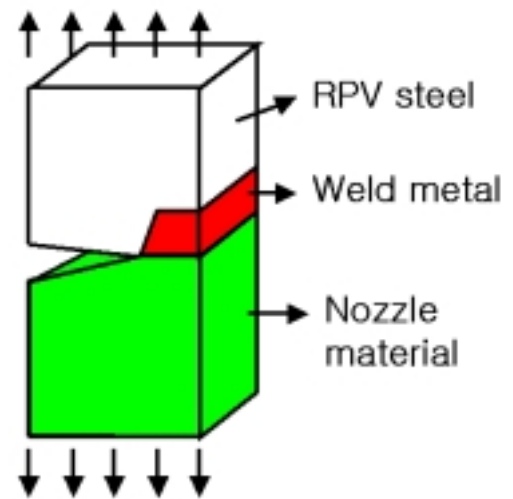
Proposed tensile type creep test method using a notched bar weld specimen to predict through-wall cracking.
